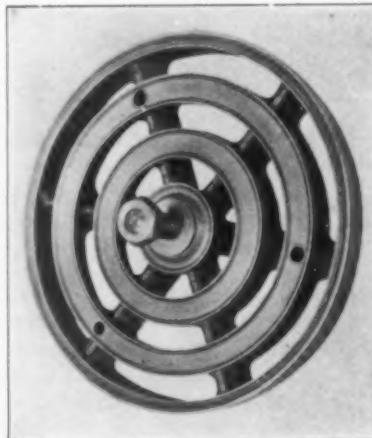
VALVE SEAT OF “MESTA” (IVERSON PATENT) AUTOMATIC PLATE VALVE
